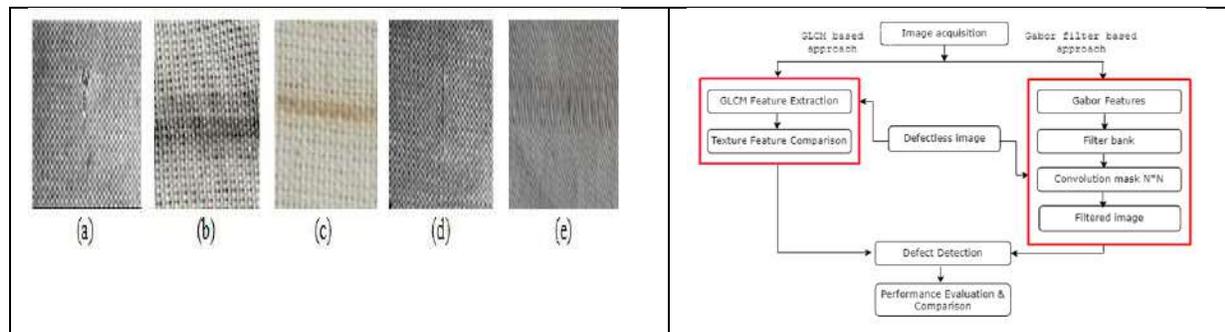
Defected fabric samples. (a) Holes (b) Oil mark (c) Oil stain (d) Stitches (e) Weft crack
